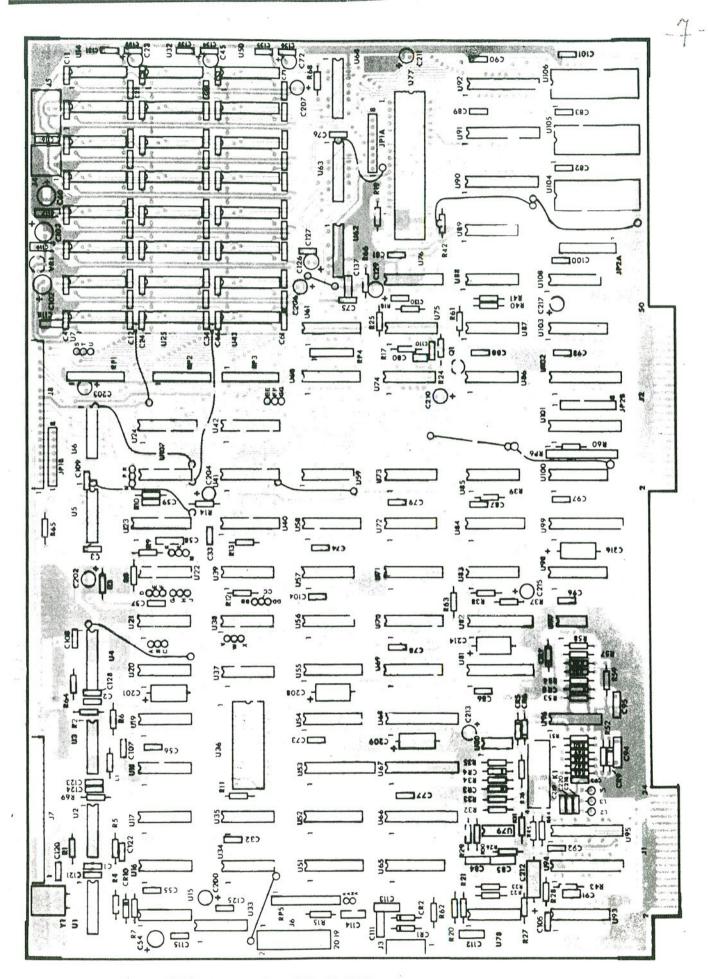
CPU PRINTED CIRCUIT BOARD - COMPONENT SIDE
